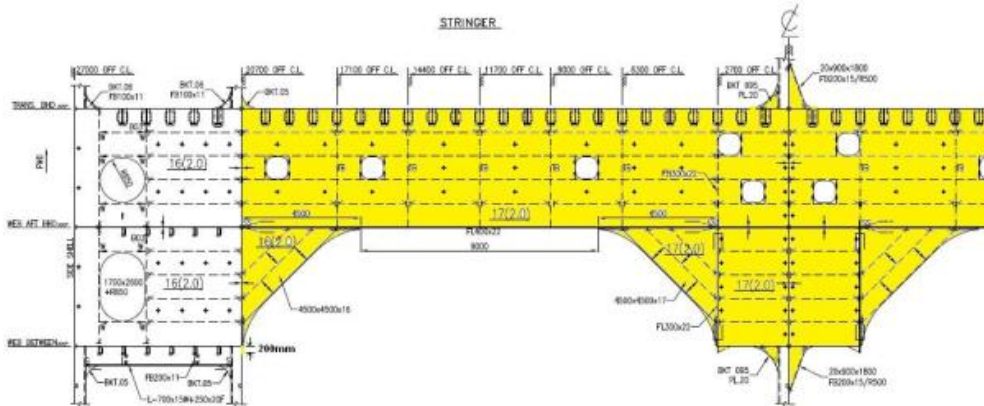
Transverse bulkheads (horizontal stringers & brackets) – Top view.
